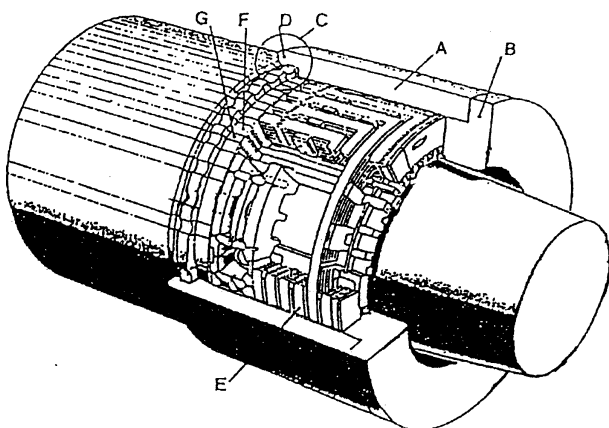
A cut-away sketch of a typical generator retaining ring assembly.
